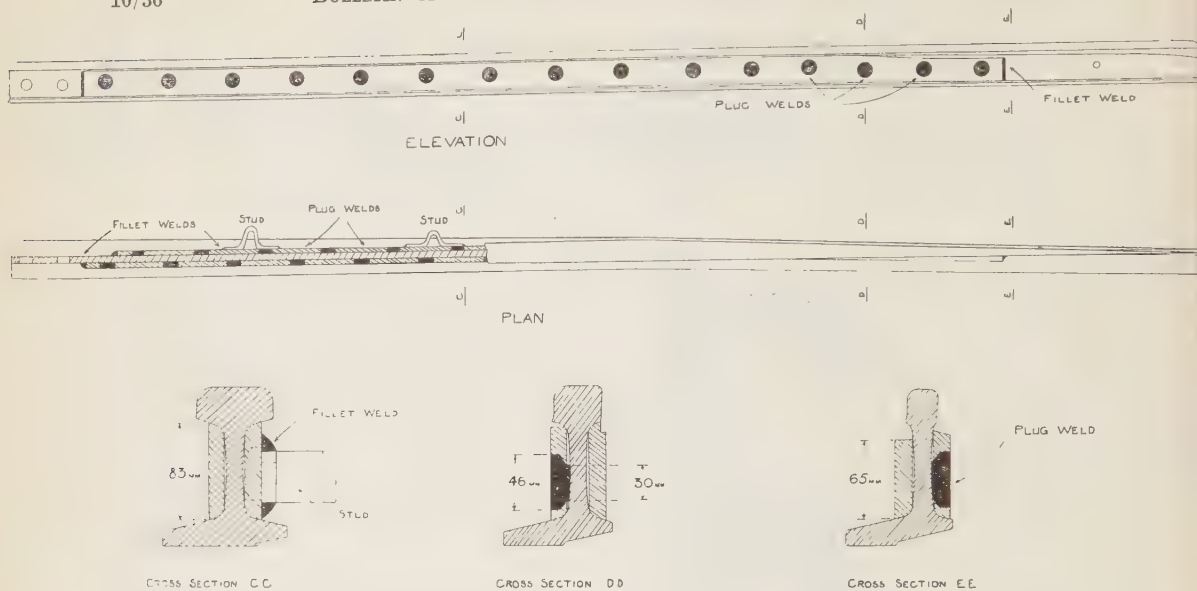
Switch with plug-welded reinforcing plates. — Japanese Government Railways.
